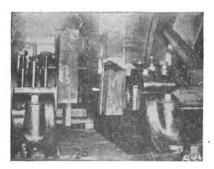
Broken Steel-Forged Crank Shaft Ready for Welding Courtesy of C. & C. Electric and Manufacturing Company
